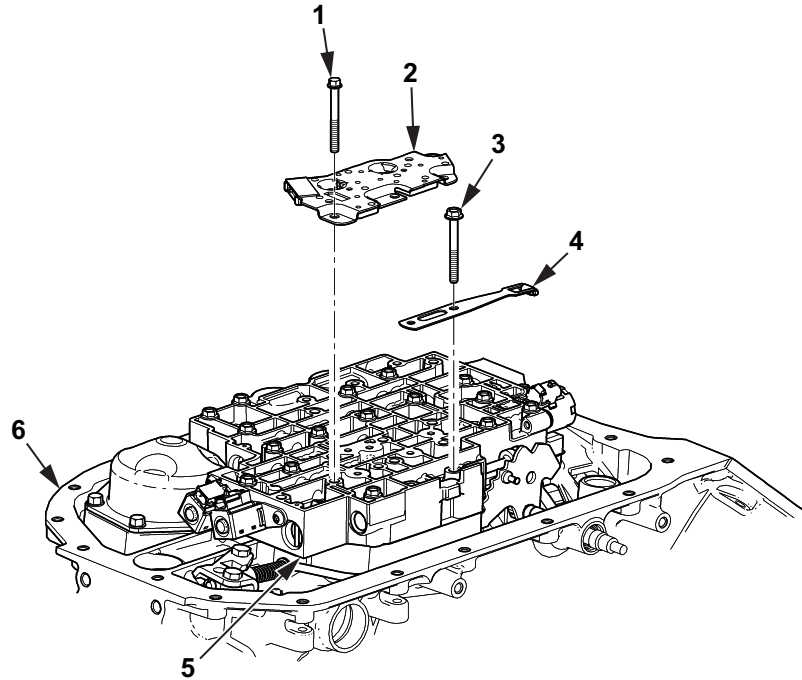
Transmission Pressure Switch and Spring and Roller Assembly.
